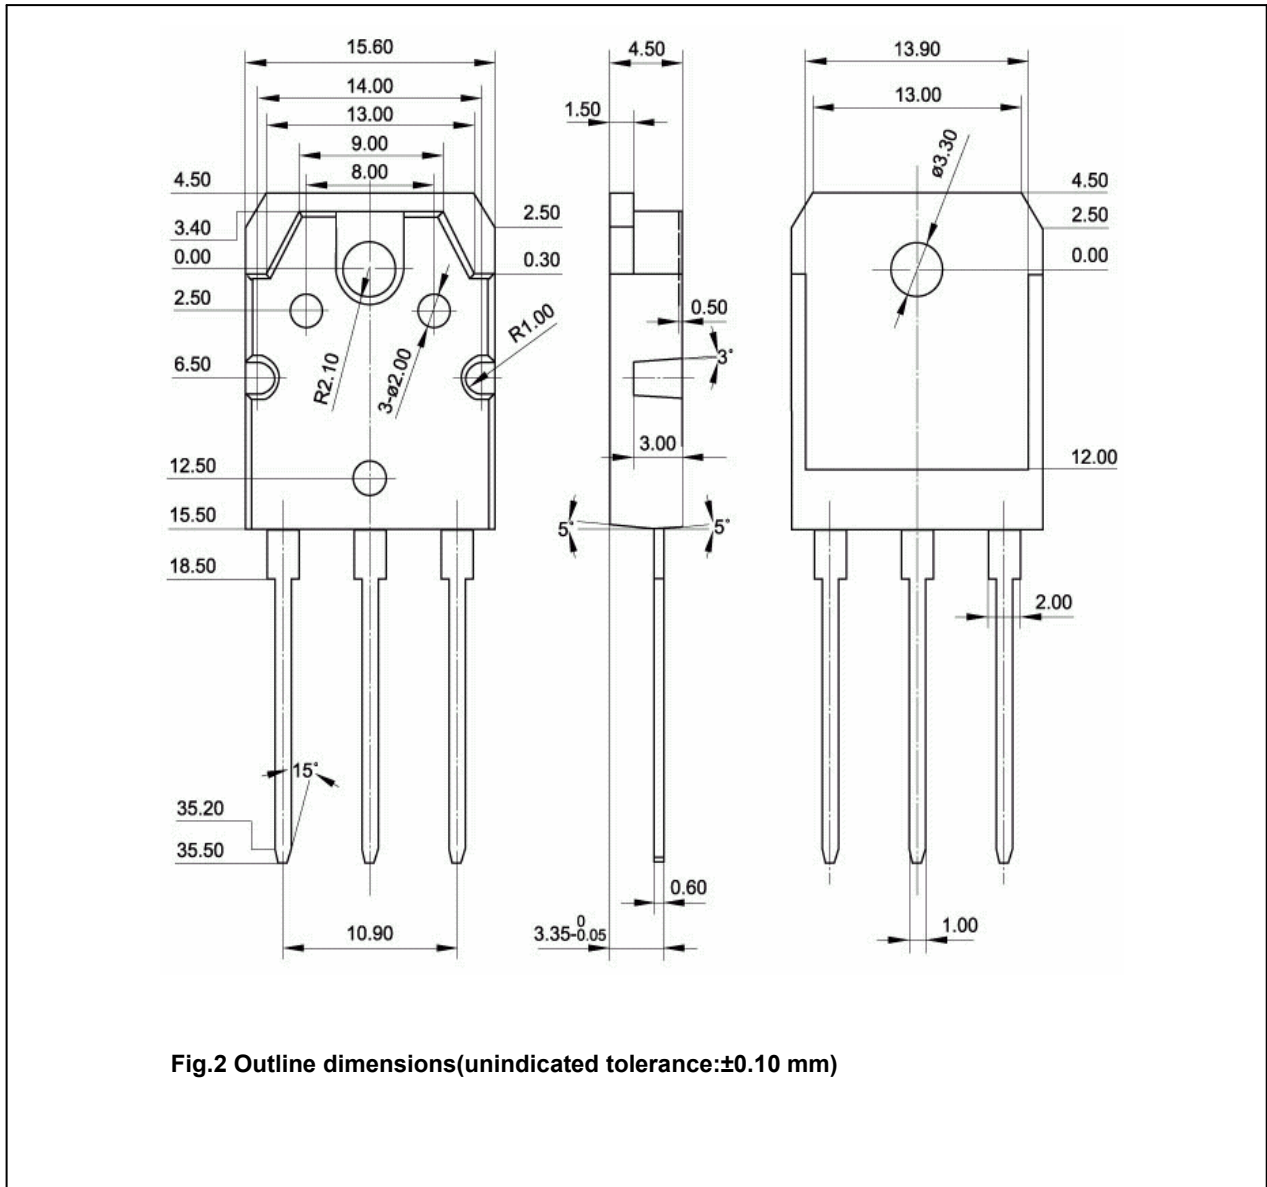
Outline dimensions(unindicated tolerance:±0.10 mm)
